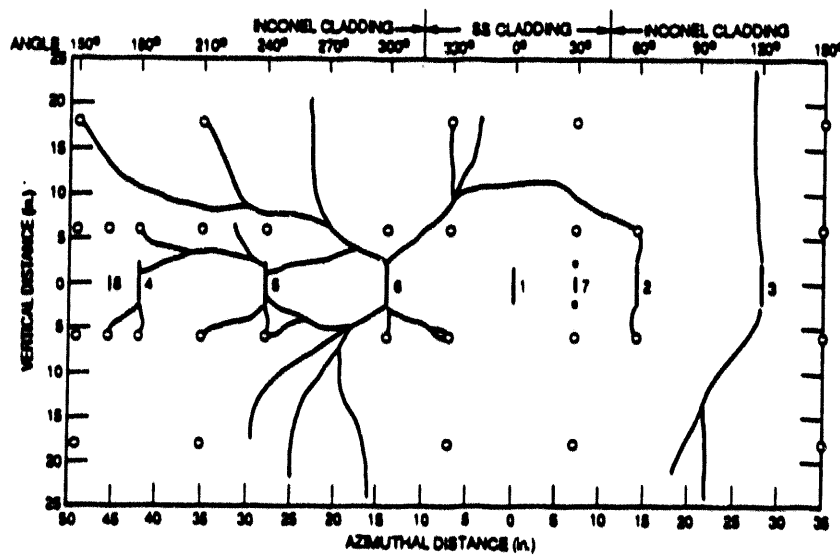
Developed view of inner surface of test cylinder showing under-clad cracking pattern following TSE-11.
